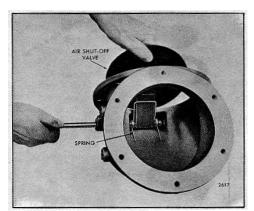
Installing Air Shut-Off Valve Spring and Valve
